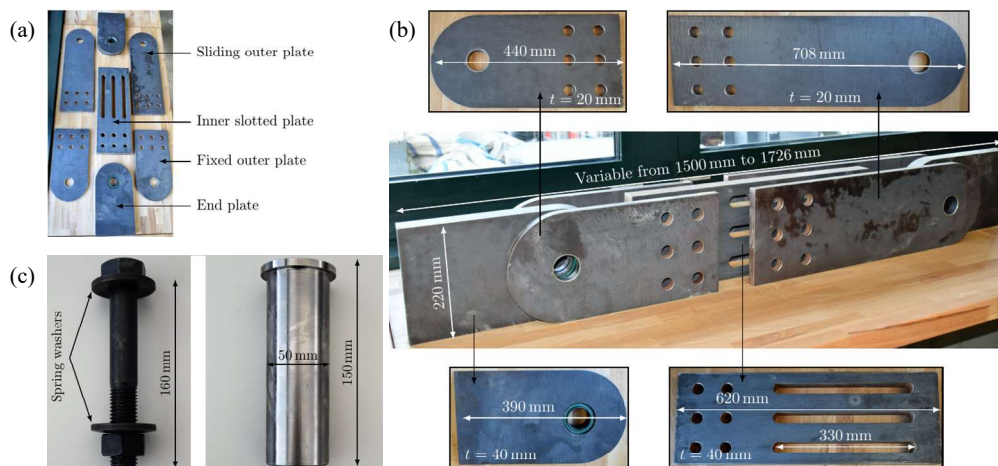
Sliding friction damper: (a) steel plates, (b) dimensions of the steel plates, (c) bolt and pin used to assemble the sliding friction damper
